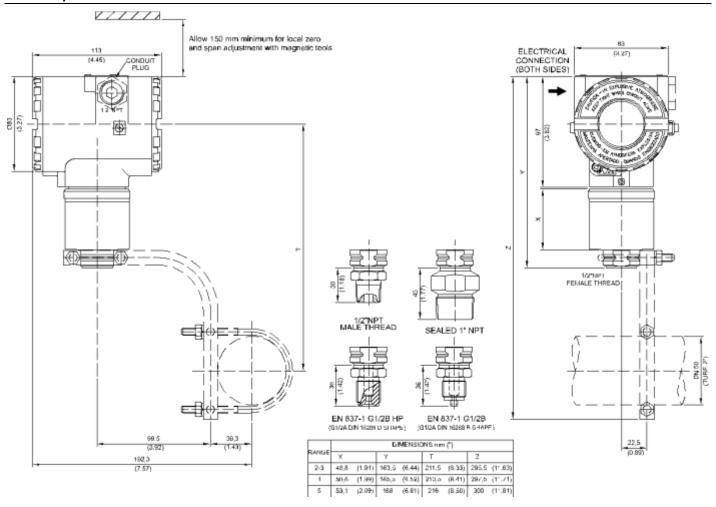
(a) – Dimensional Drawing and Mounting Position for LD291
